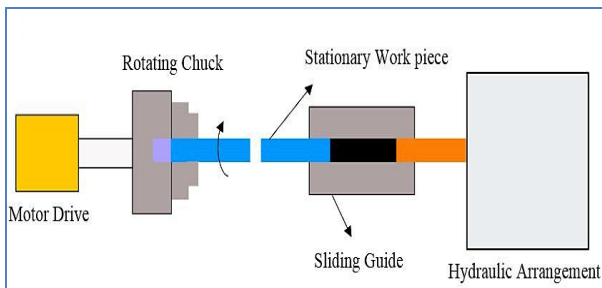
Schematic diagram of continuous drive friction welding process.
